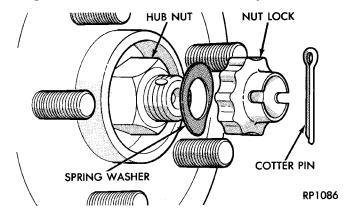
Cotter Pin, Nut Lock and Spring Washer
